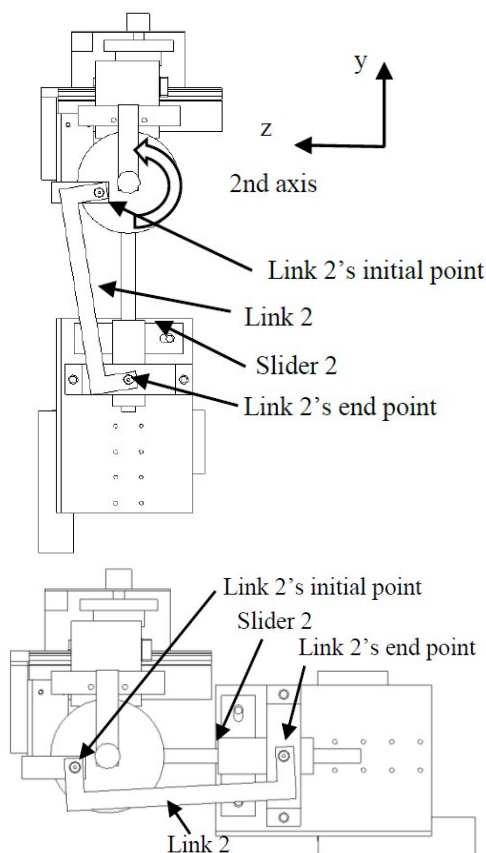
Side mechanism at shoulder flexion 0 deg. and 90 deg. (Side view)
